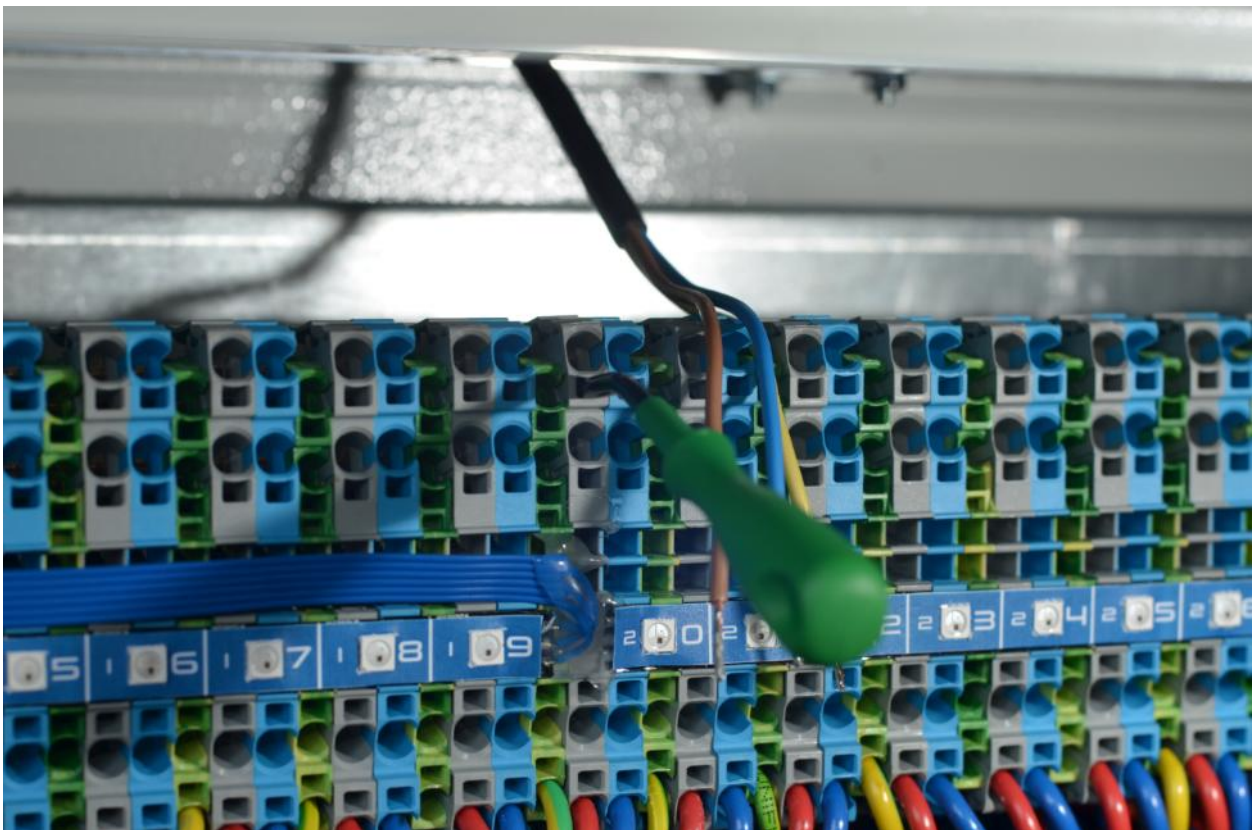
The cable mounting tool is inserted into the terminal.
